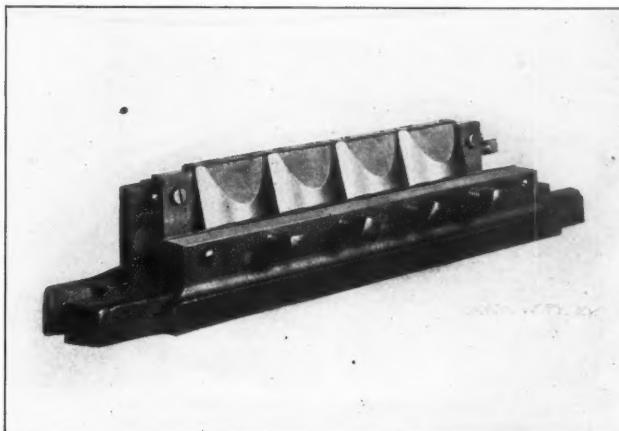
Fixture for Holding Jaws while Milling the Bevel
